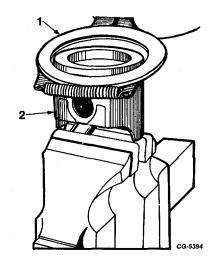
Installing Piston Ring Using Suitable Piston Ring Expander Tool 1. Piston ring expander 2. Piston
